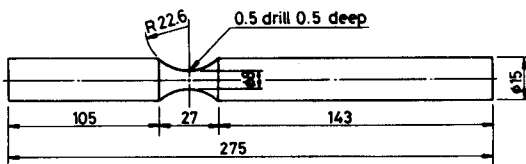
Shape and dimension of fatigue test specimen (unit : mm)
